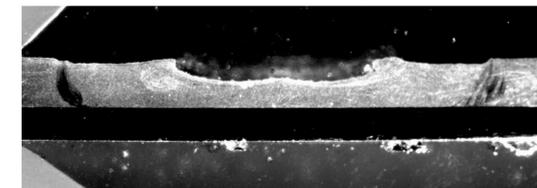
Macro of the cross section of a weld made using the pin plunge weld sequence
